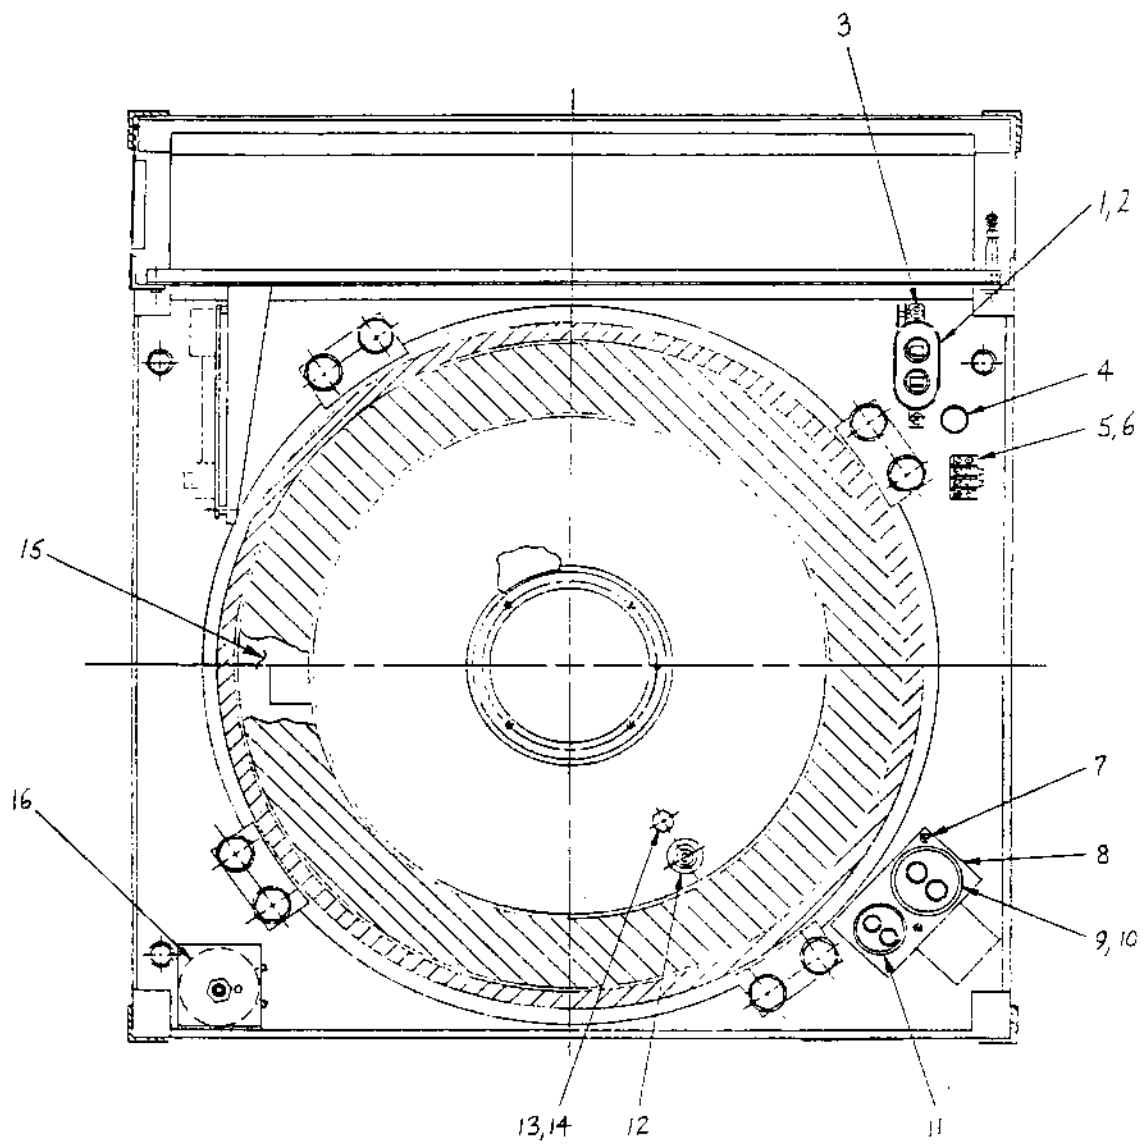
RC-5B PLUS Evaporator Assembly, Top View
